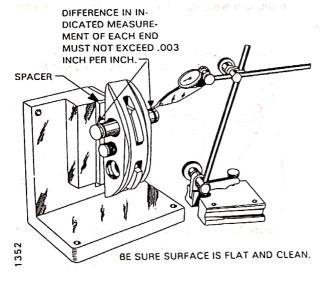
Checking Parallel and Squareness of Counterweight Bushings with Gage Fixture ST-91 — Vertical Position
